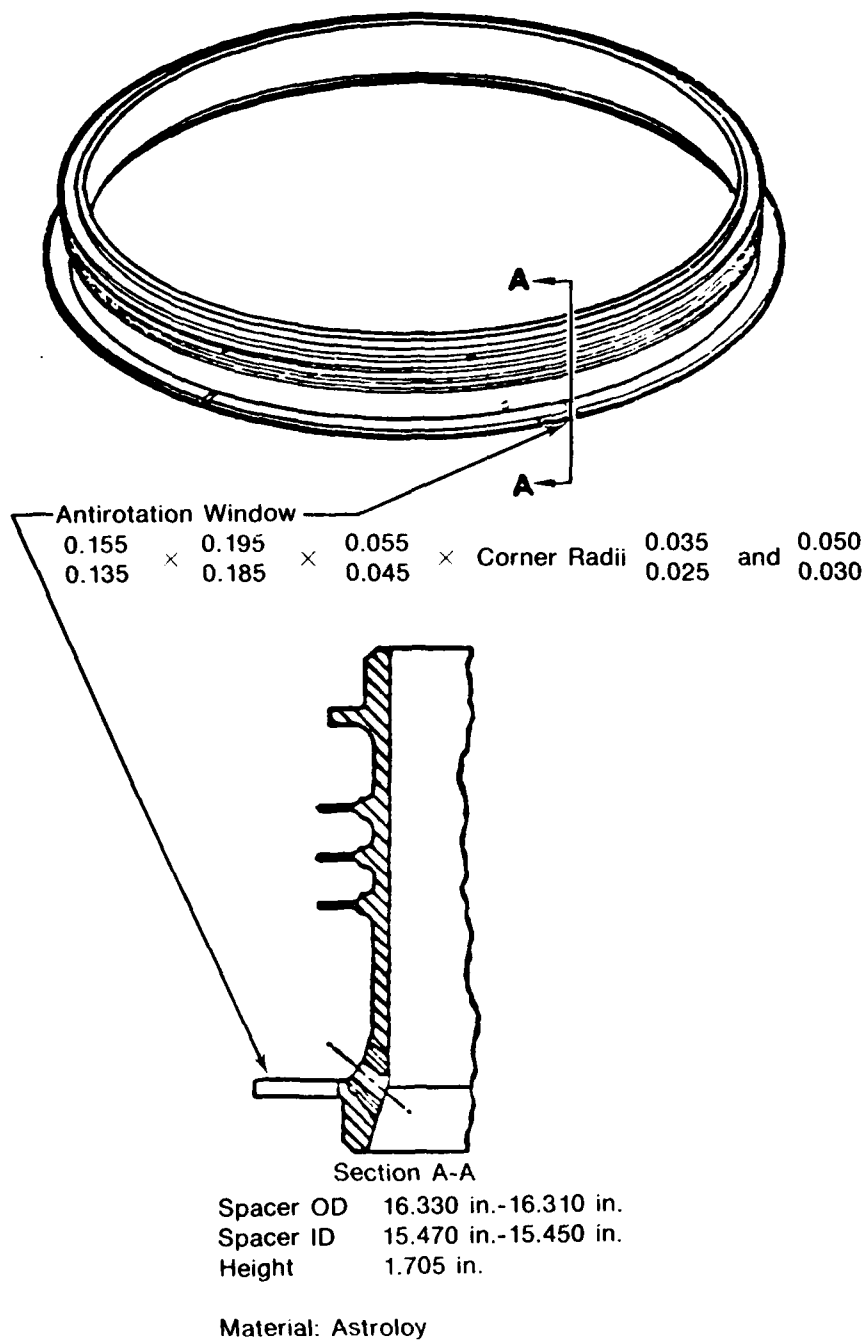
9-10 Compressor Spacer (P/N 4050979)
